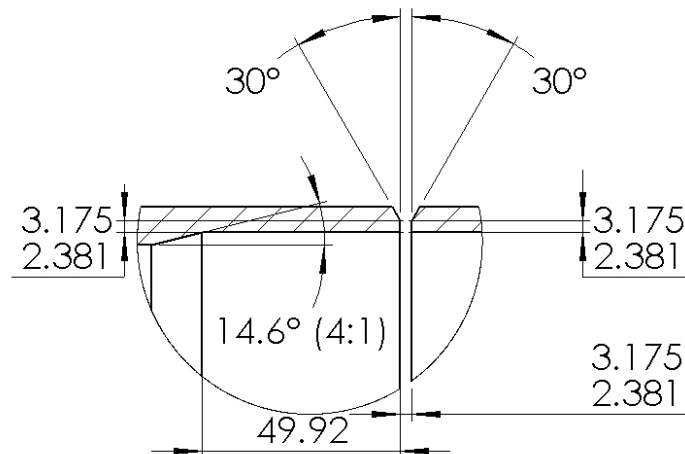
6.35 mm-to-9.53 mm (0.25 inch-to-0.375 inch) Wall Thickness Step with Counterbore (Dimensions in mm)
